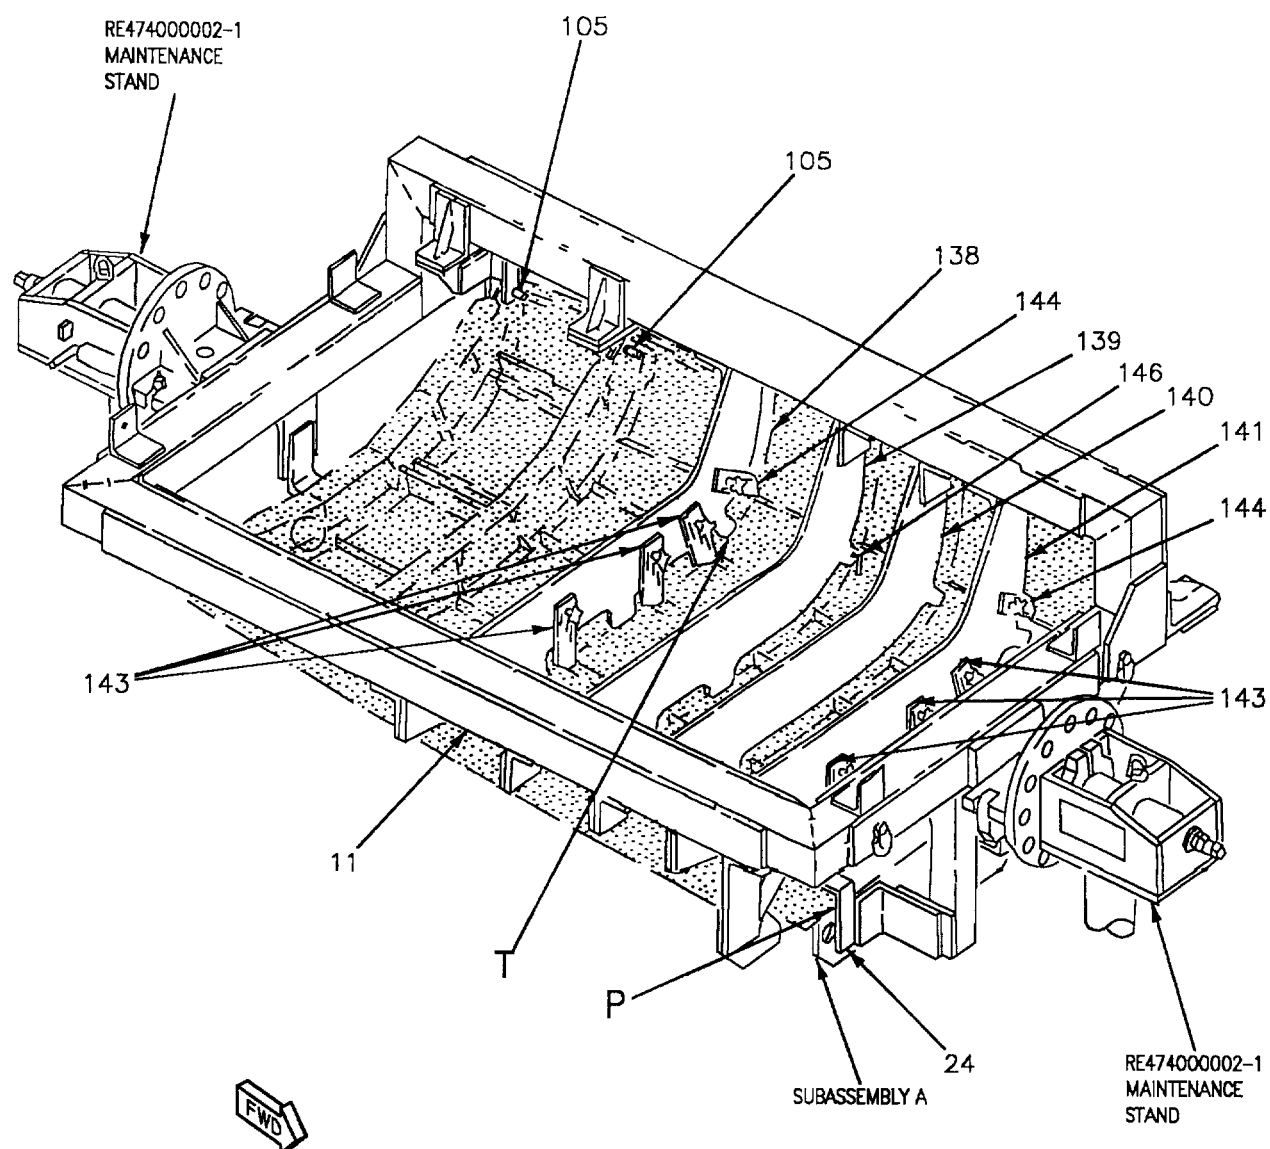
Installation of Door Into Maintenance Fixture (Sheet 3)
